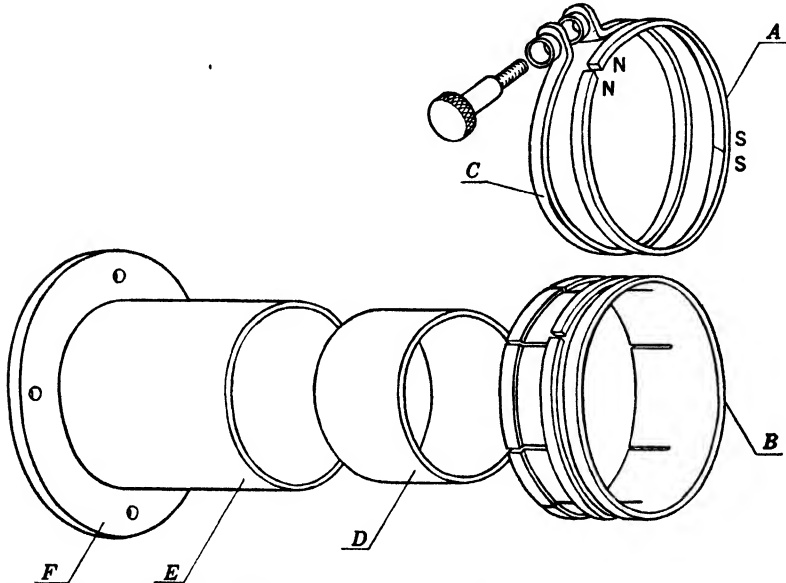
Precentering assembly. *A*, the magnet—GE “Cunife” alloy 0.120 × 0.050 strip, rolled into 2-in. ID circle; *B*, brass ring; *C*, brass clamping ring; *D*, soft iron shunt to be soldered into rear end of supporting cylinder; *E*, brass supporting cylinder; *F*, mounting flange.
